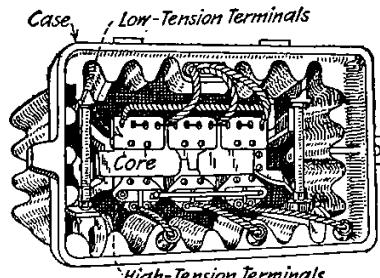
Interior view of a Westinghouse three-phase transformer.
